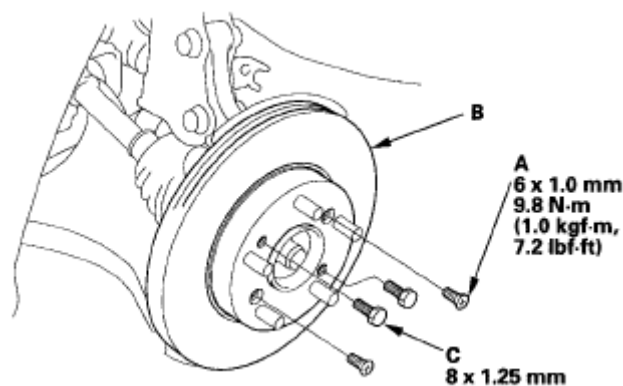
Identifying Brake Disc Retaining Screws (With Torque Specifications)
